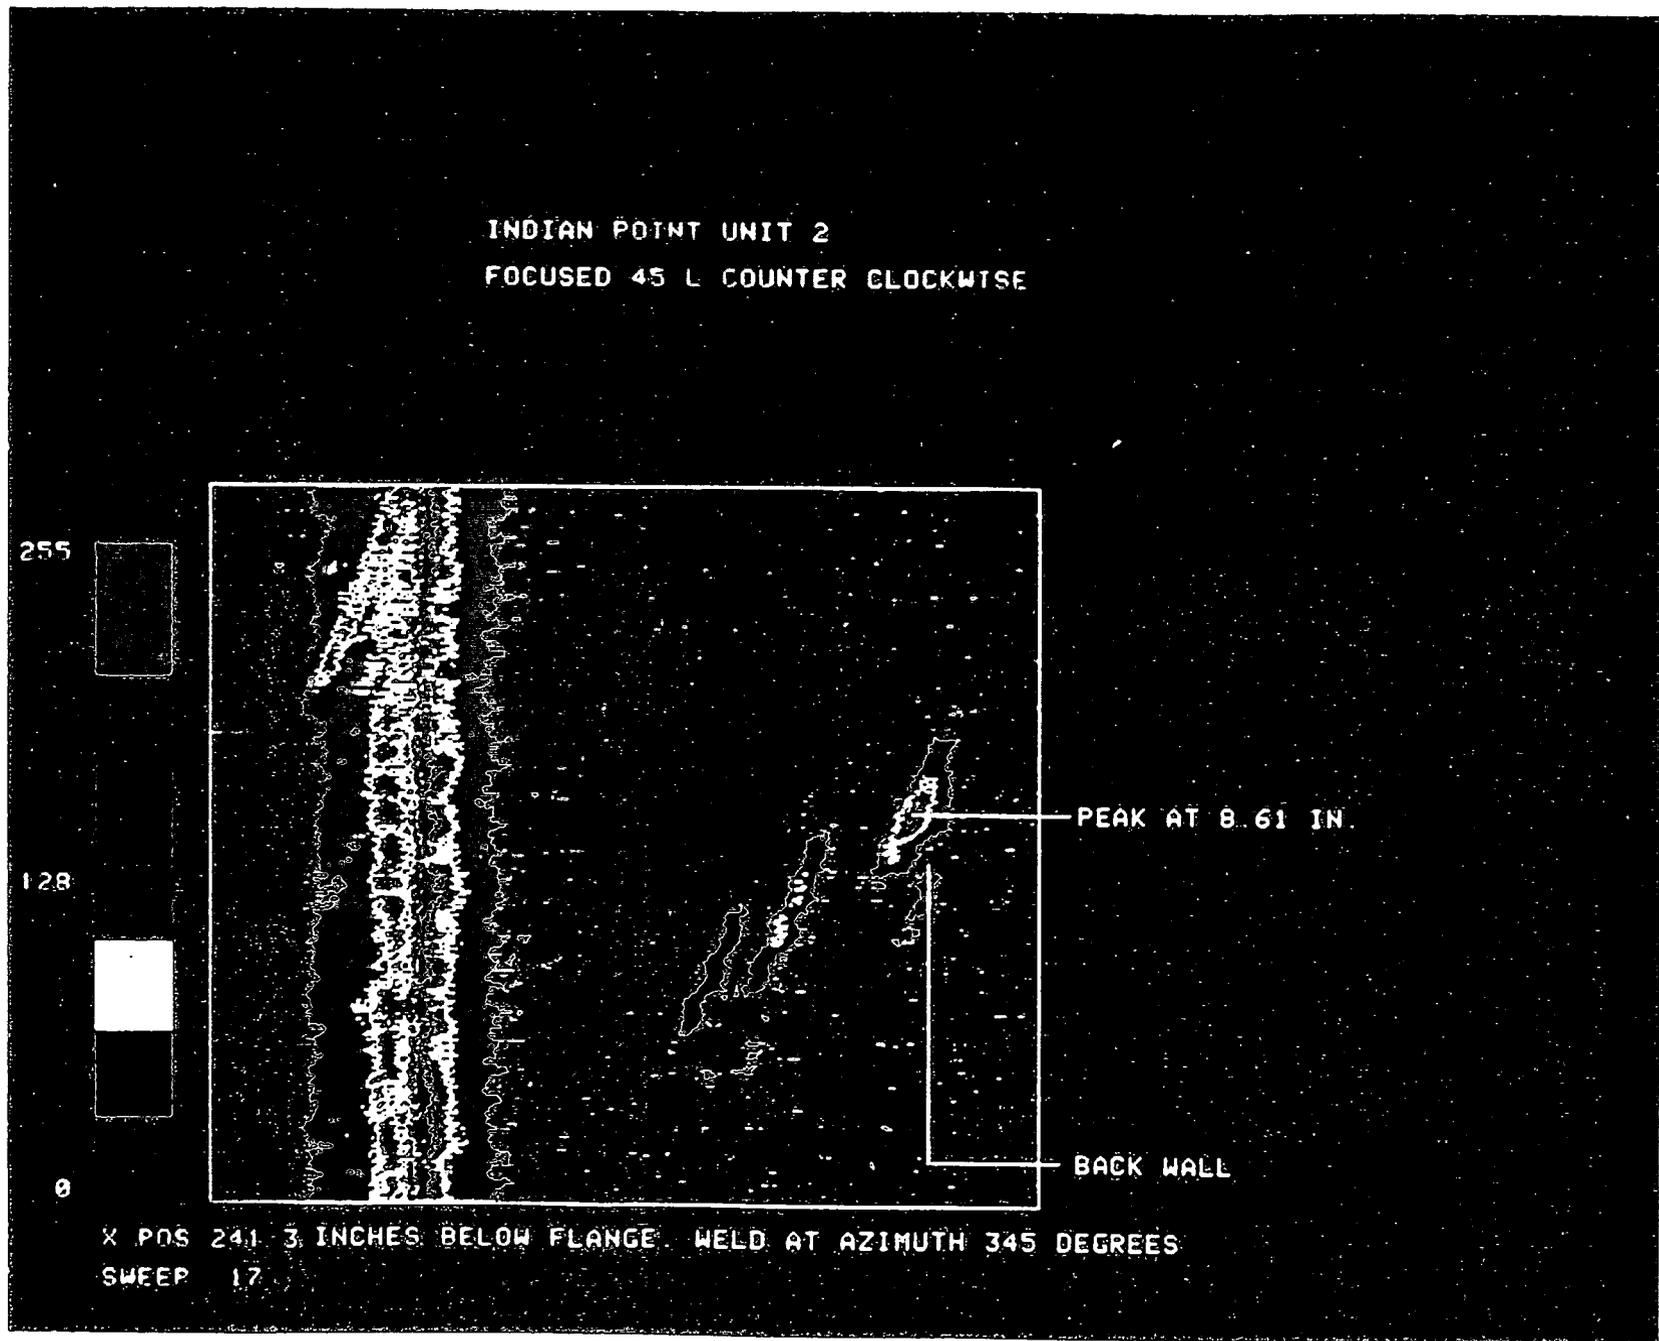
Indian Point Unit 2, Weld 12, Focused 45°L CCW
